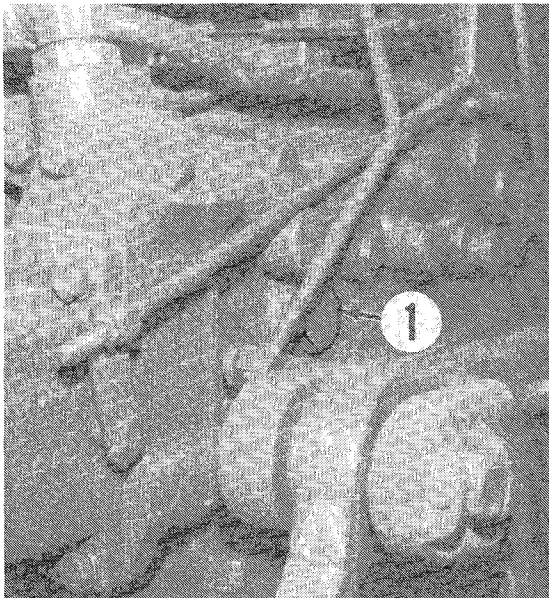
Remove plug (1) located in side of control valve housing for access to valve operating cam adjusting screw. Turn screw counterclockwise to increase valve clearance or clockwise to reduce clearance.
